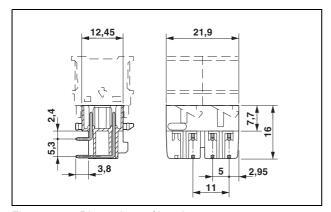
Dimensions of header HSCH 2,5-2U-2220 9005
